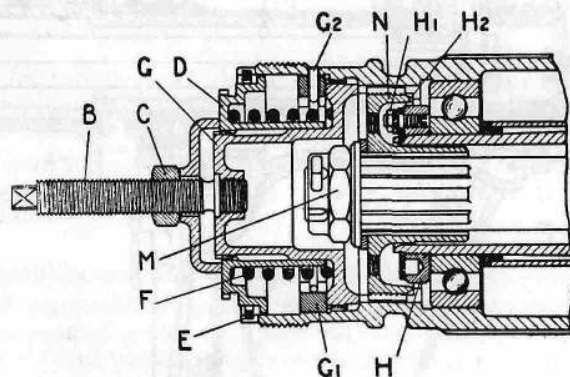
TOOL IN POSITION FOR REMOVING LOCKING RING.
